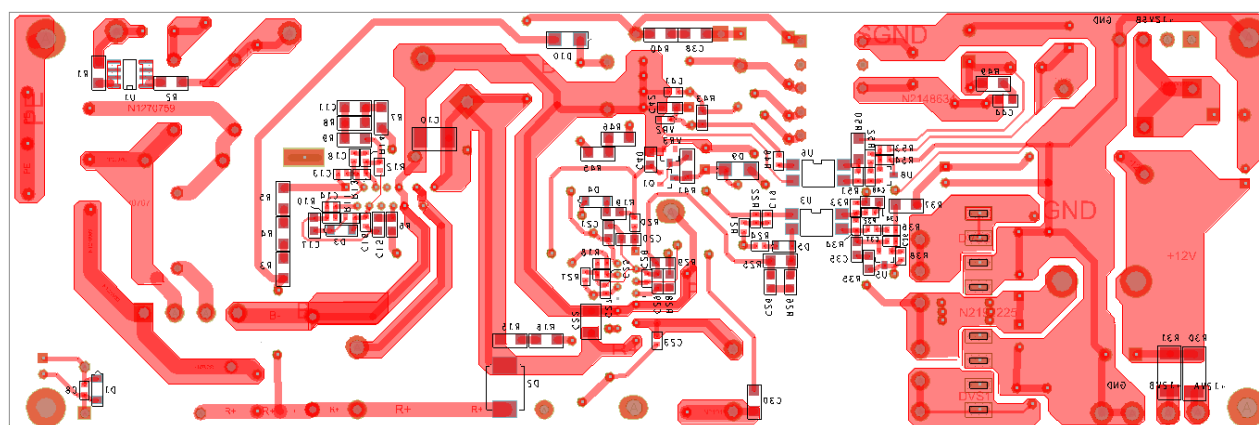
Printed Circuit Layout – Main Board, Bottom Side.
